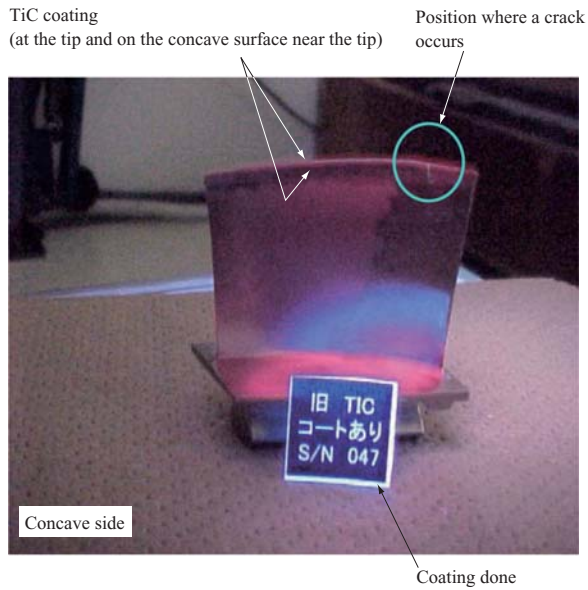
Appearance of compressor blade after high cycle fatigue test
